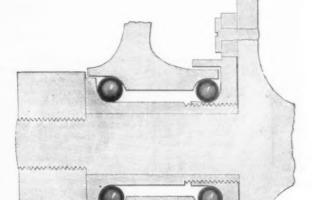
Ball Bearings of Springfield Roadster, 1888 Pattern.
